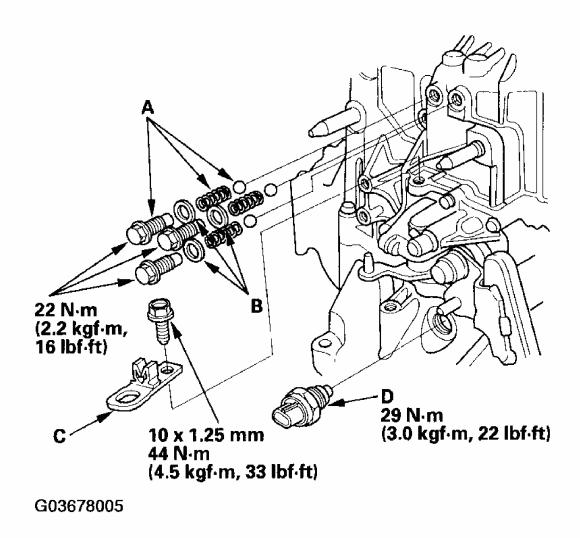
Identifying Tightening Torque Of Detent Bolts, Springs, And Steel Balls Washers
